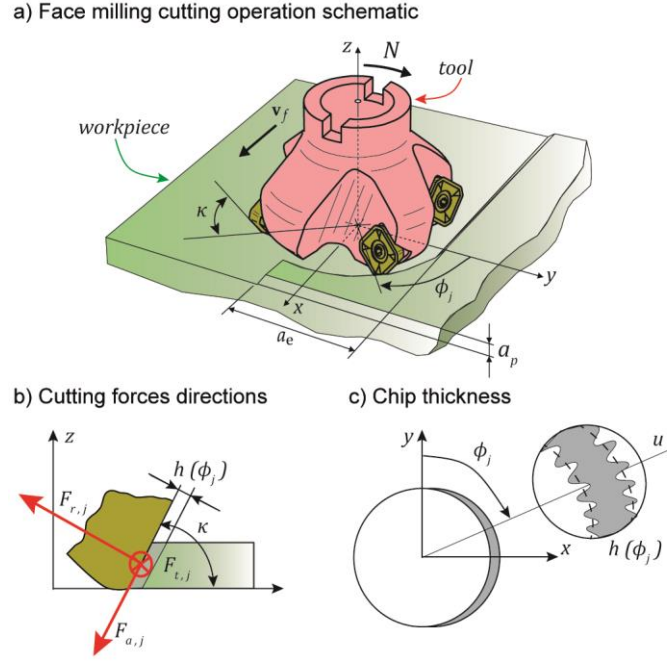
a) Face milling cutting operation schematic; b) Cutting forces directions; c) Chip thickness.
